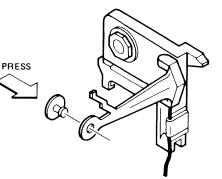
HEAD LOAD BUTTON REPLACEMENT
